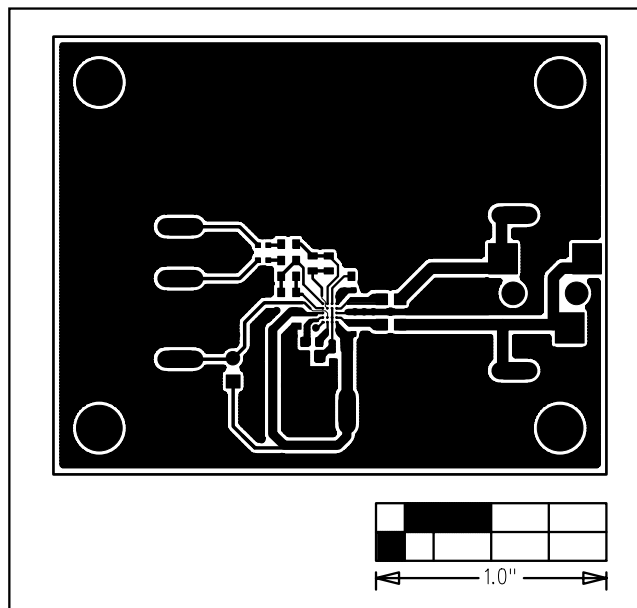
MAX9788 EV Kit PCB Layout—Component Side
